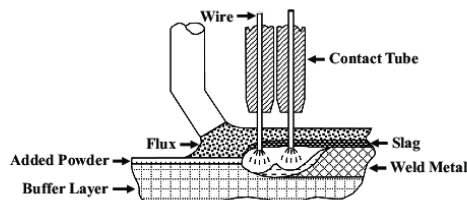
Schematic representation of twin-wire submerged arc welding with flux and added metal powder ahead of the welding arc.
